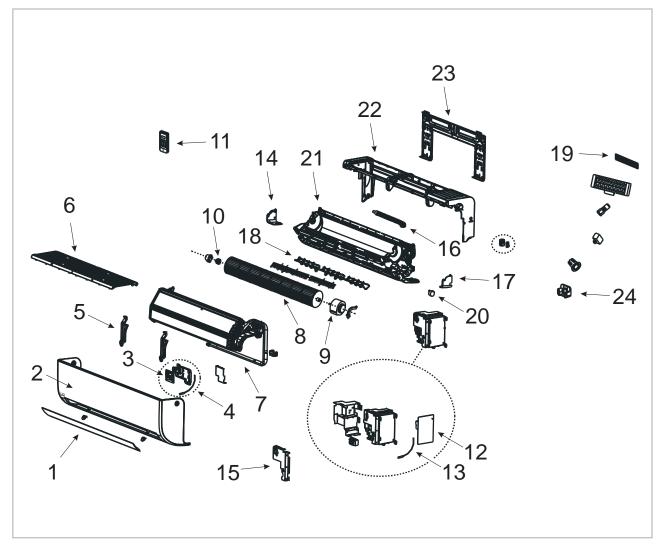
Exploded view of the unit RVT 264-684 DC IT
